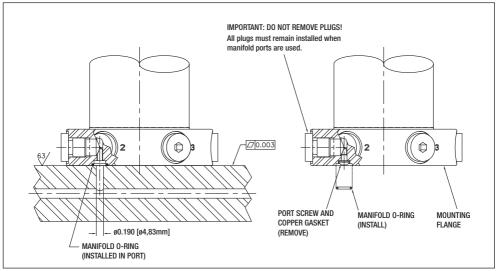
, Manifold Mounting Details, Collet-Lok® Products Equipped With Manifold Ports
